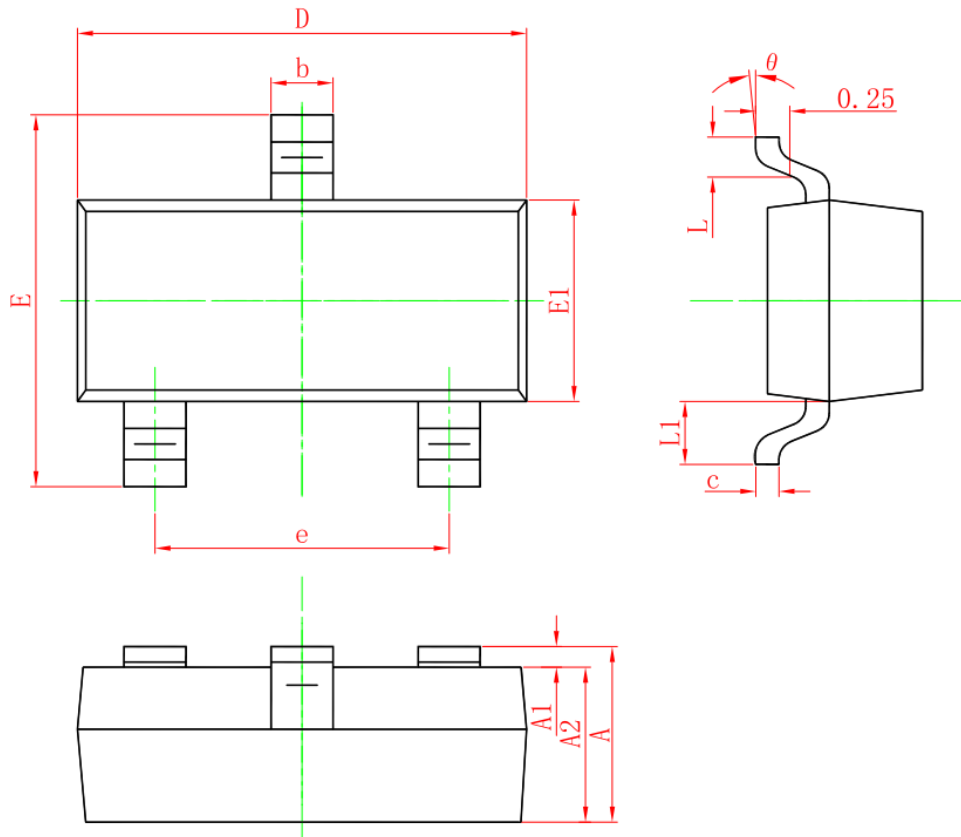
SOT23-3L Package Shape and Dimension in millimeters and (inches)
